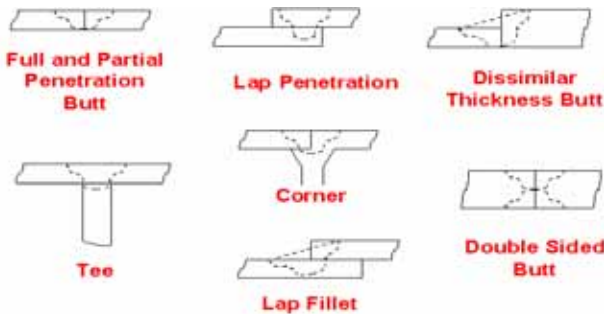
Typical Friction Stir Weld joint Designs
